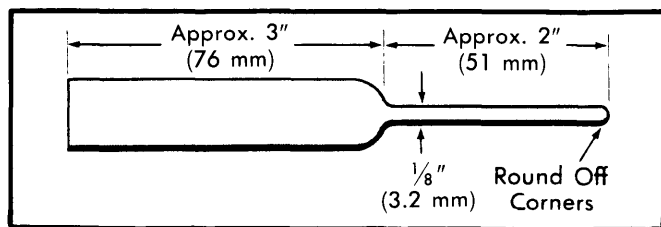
Rear Main Bearing Oil Seal Installing Tool
